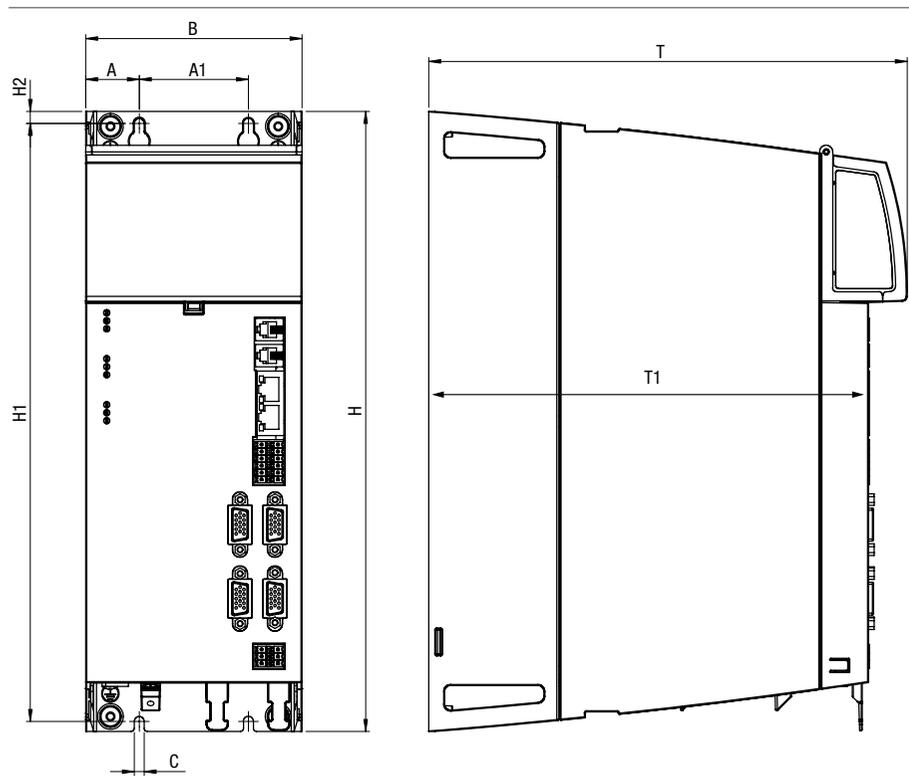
Dimensional drawing, ServoOne CM axis controller BG2
